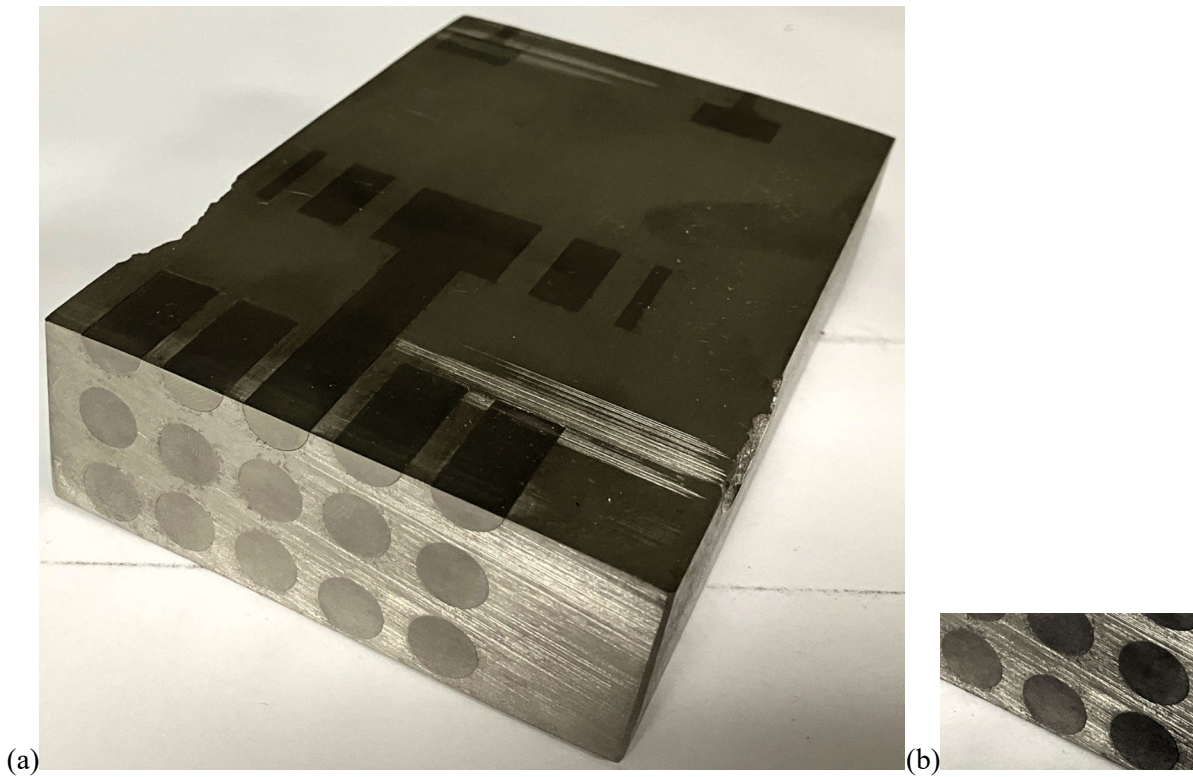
Image of a Sn-Bi casting and stainless steel rods cross-sectioned in the vertical and horizontal directions through the fuel-rod and bottom spacer regions: (a) entire section, (b) inset of the horizontal cross section with enhanced contrast.
